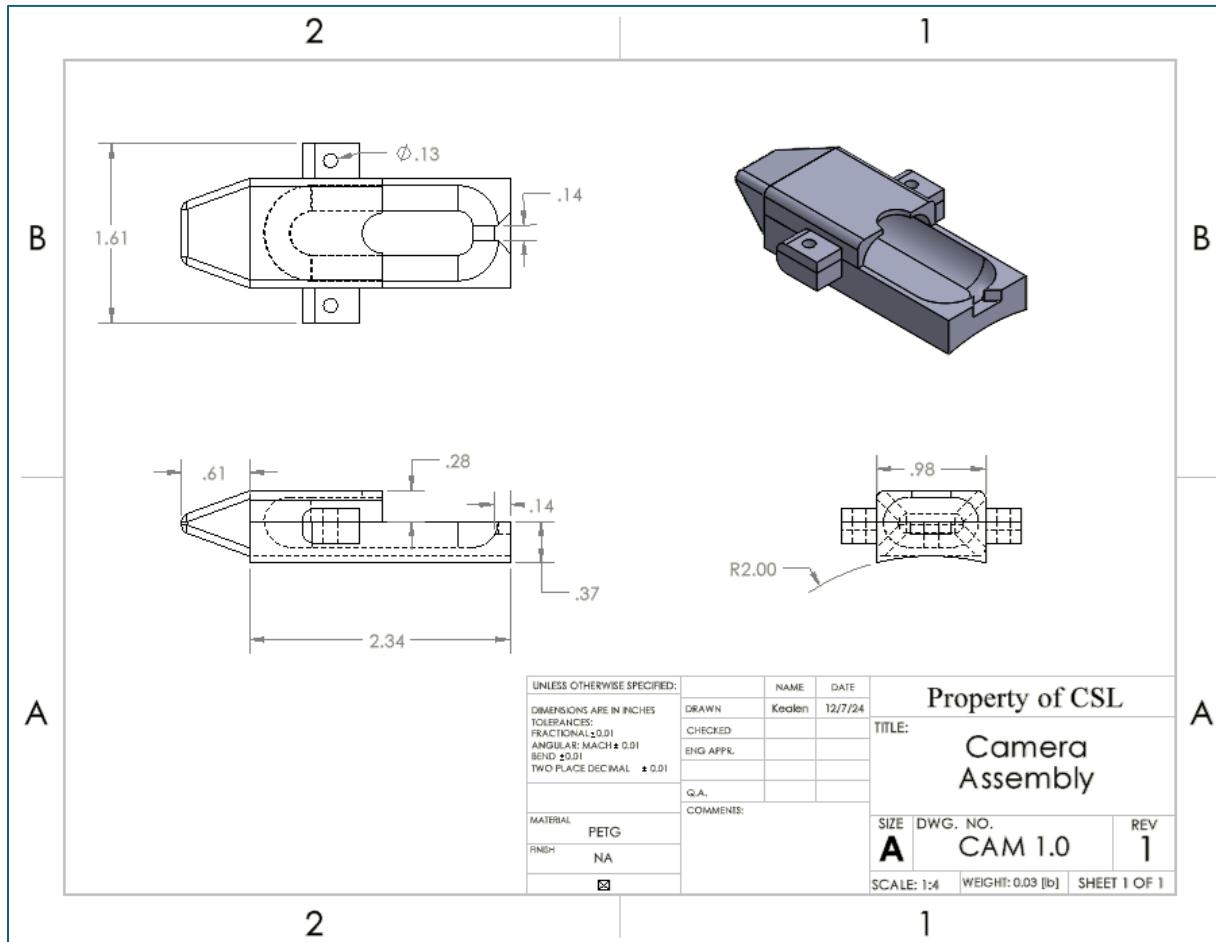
Dimensioned SolidWorks drawing of the camera shroud.
